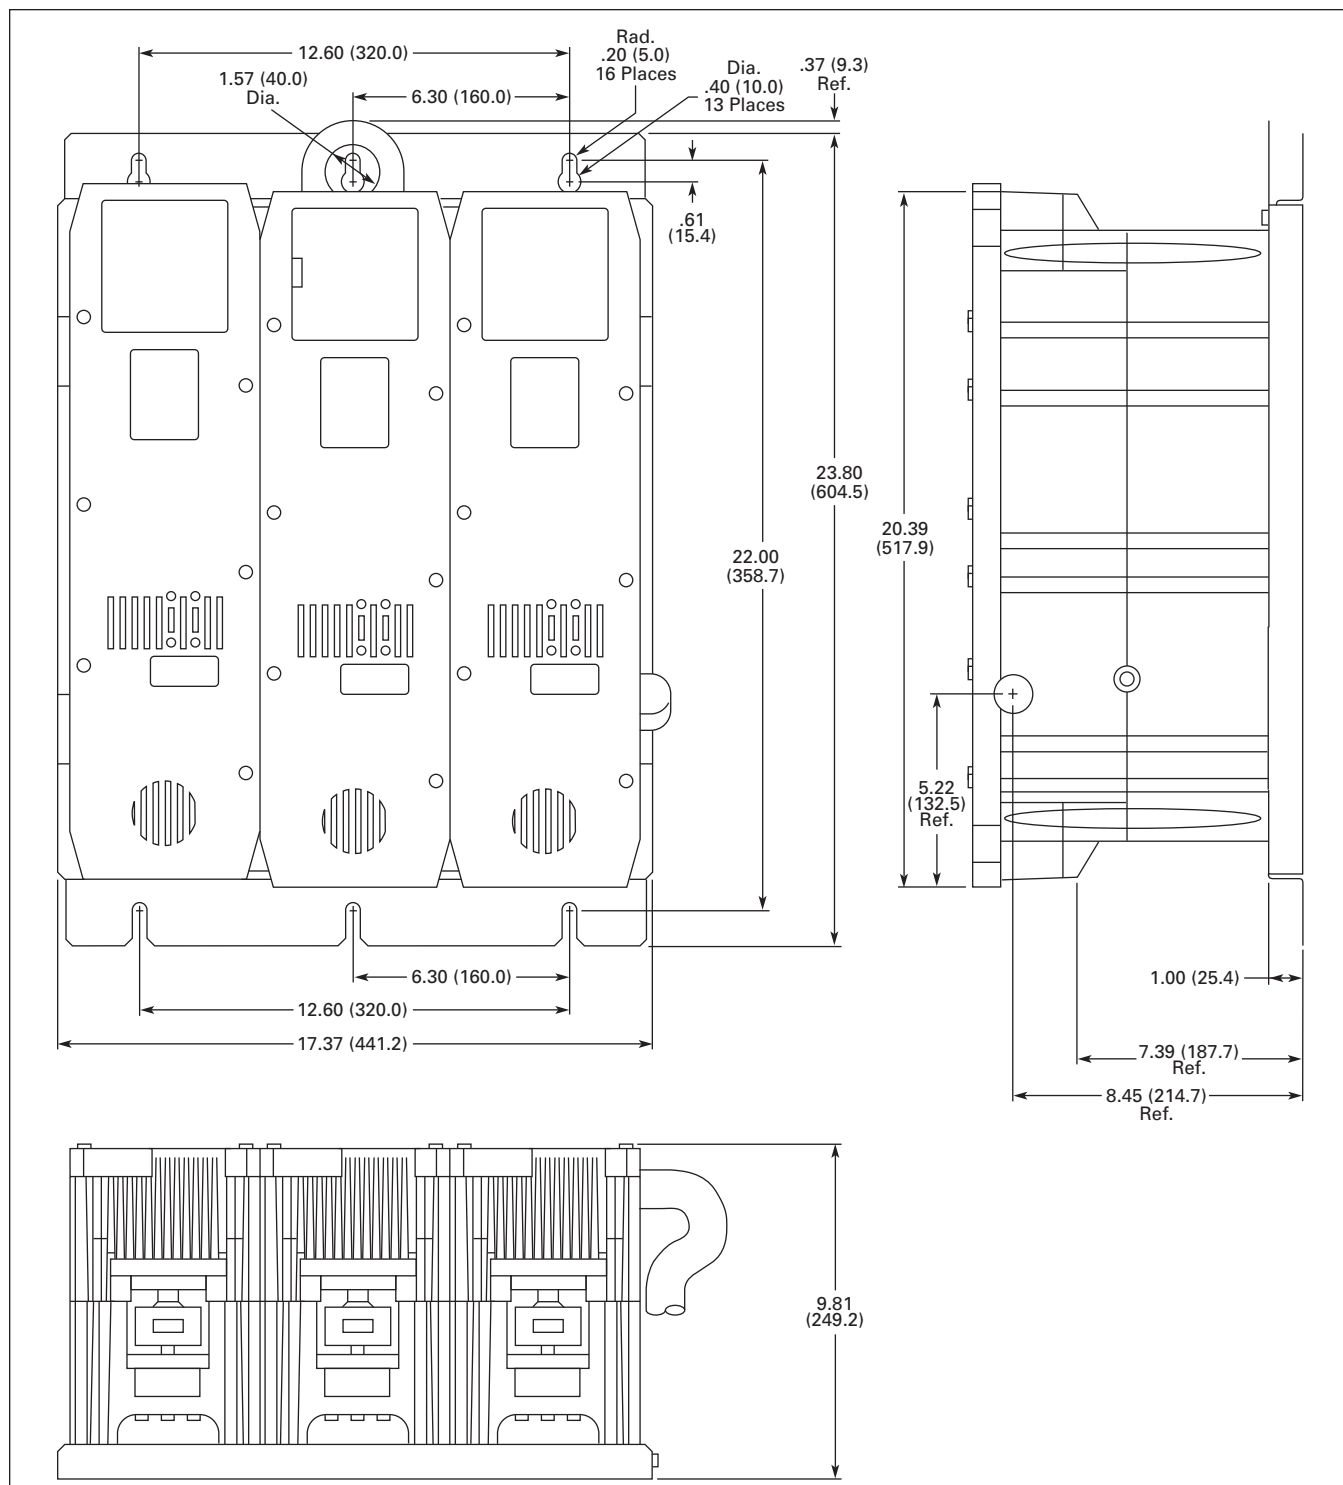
SMV811A — 2,500V AC — Approximate Dimensions in Inches (mm)
